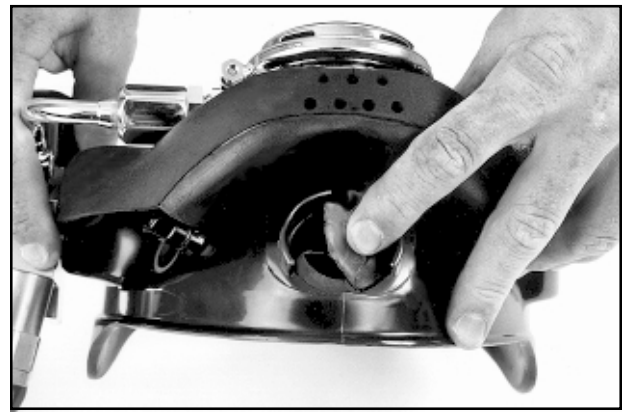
Note how the main exhaust body is molded into the frame on the KMB 28.
